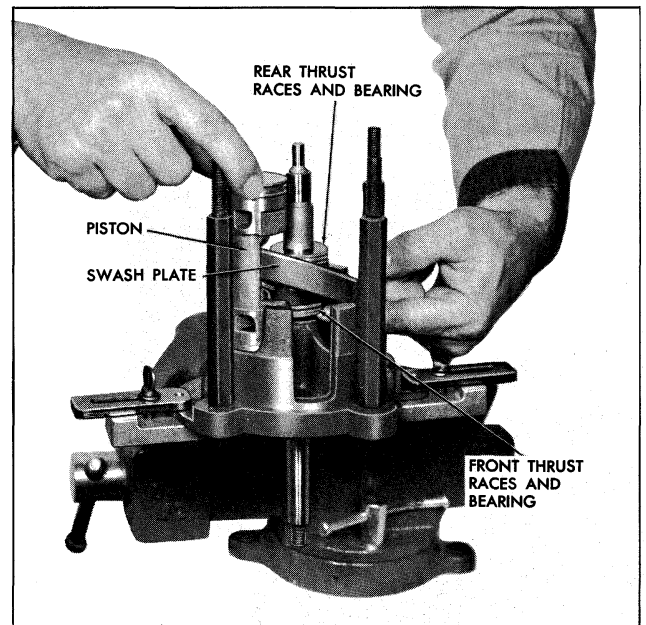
Installing Piston with Balls and Front Shoe Only
